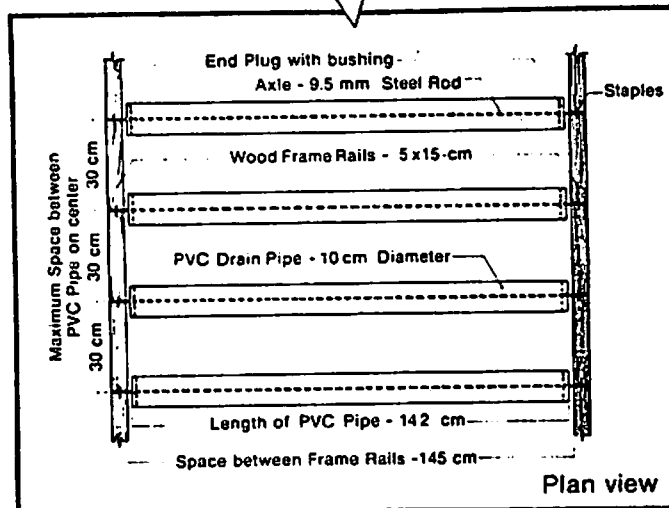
An illustration of a polyvinyl chloride (PVC) roller conveyor bench.
